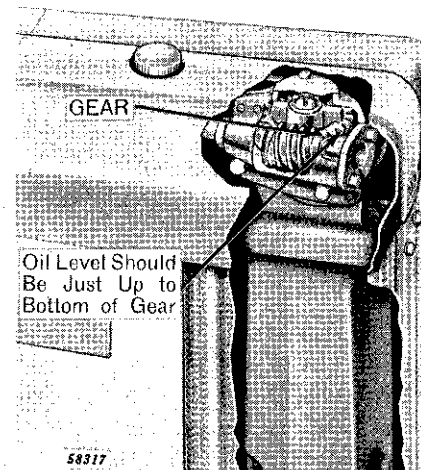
Steering Gear Oil Level (Manual Steering)
